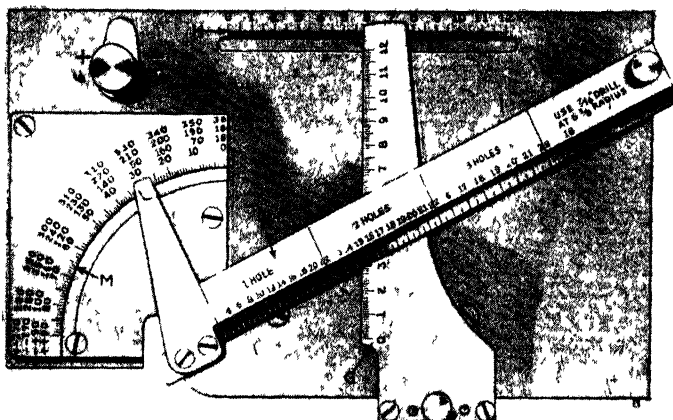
CUTMETER OF GISHOLT STATIC BALANCING MACHINE
